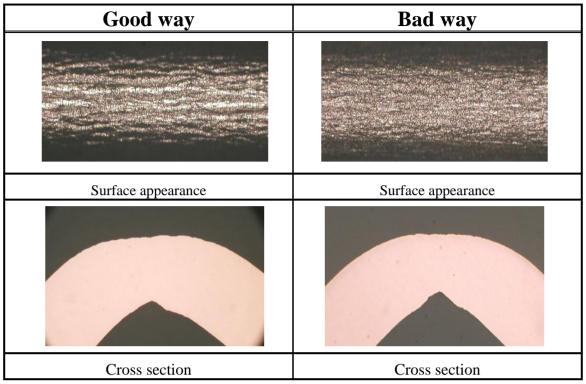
Surface appearances and cross sections of 90° W-shaped bending test specimens. Temper H , Thickness = 0.25mm , R/t=0 , Width =10mm
